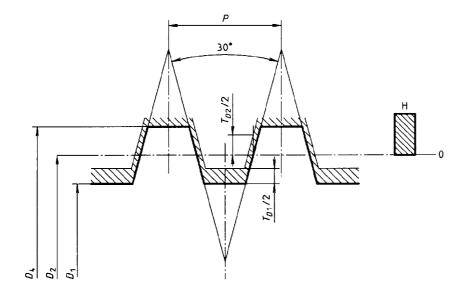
Nut threads with tolerance position H for the pitch diameter
